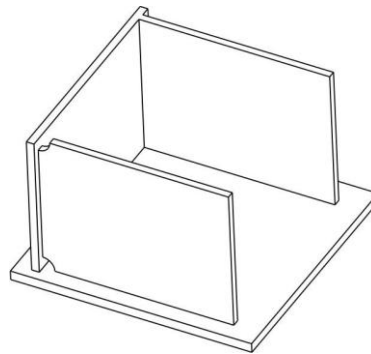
(3) Forms of Medium Assembly Fillet Welding Specimens
